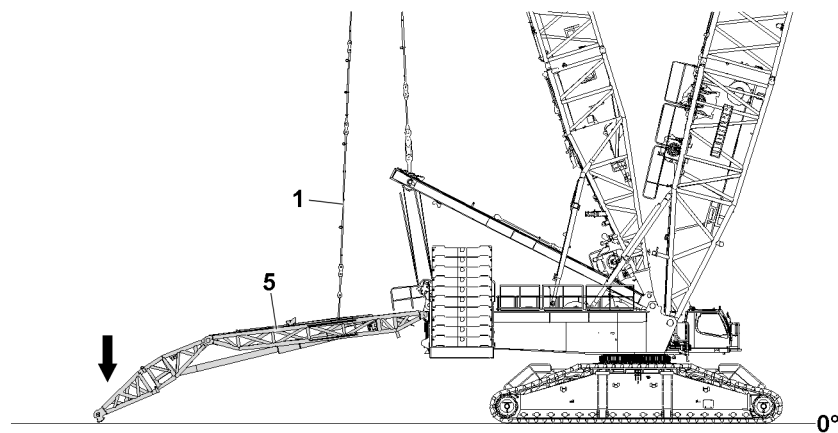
Assembling the end section — Placing the suspended ballast guide “V-frame” on the ground
